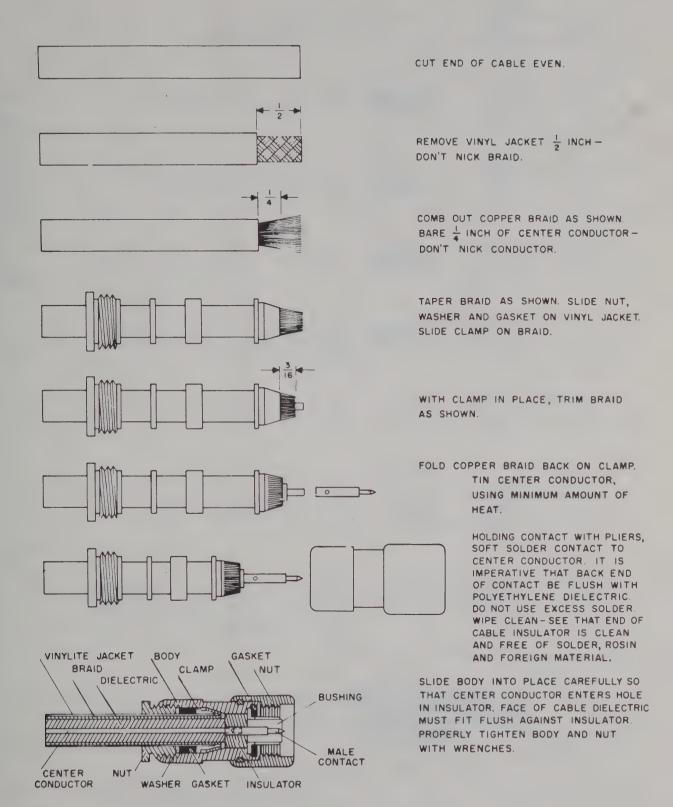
Assembly of Connector UG-21B/U to Coaxial Cable
